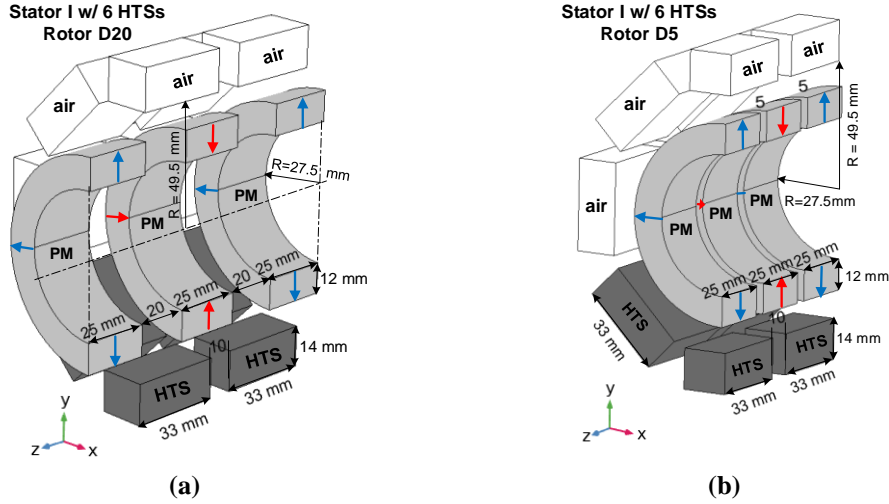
Dimensioned 3D perspective of the half part (used in FEA simulations) of the tested geometries with 6 HTS bulks on the bottom of stator I and with (a) rotor D20 and (b) rotor D5.
